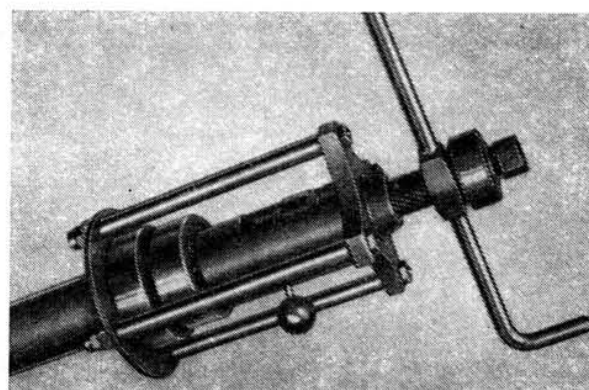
/4 - Pressing Ball Bearing on Shaft Using MP 5-112 Jig and Its Liner (larger)
